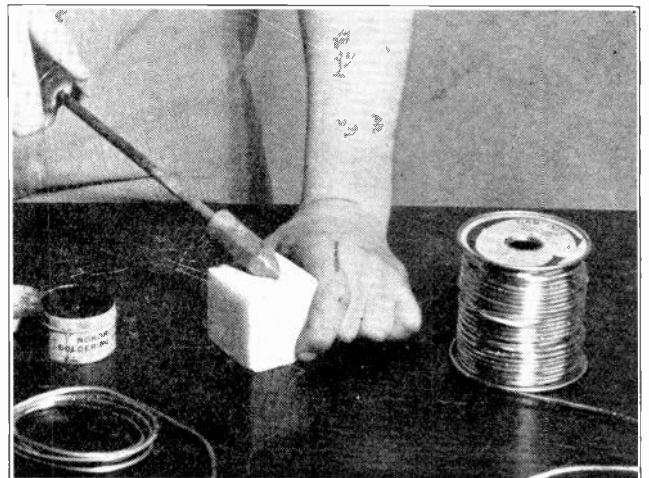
This photo shows the method of cleaning and tinning a soldering copper with a block of salammoniac.
